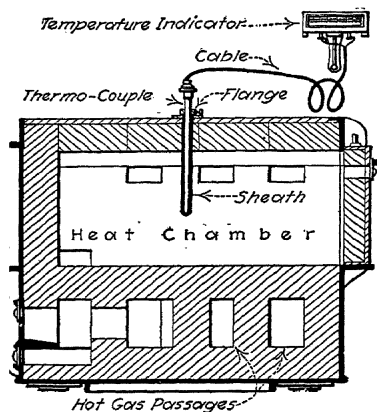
Thermo-electric pyrometer installed in an oil-burning furnace.
